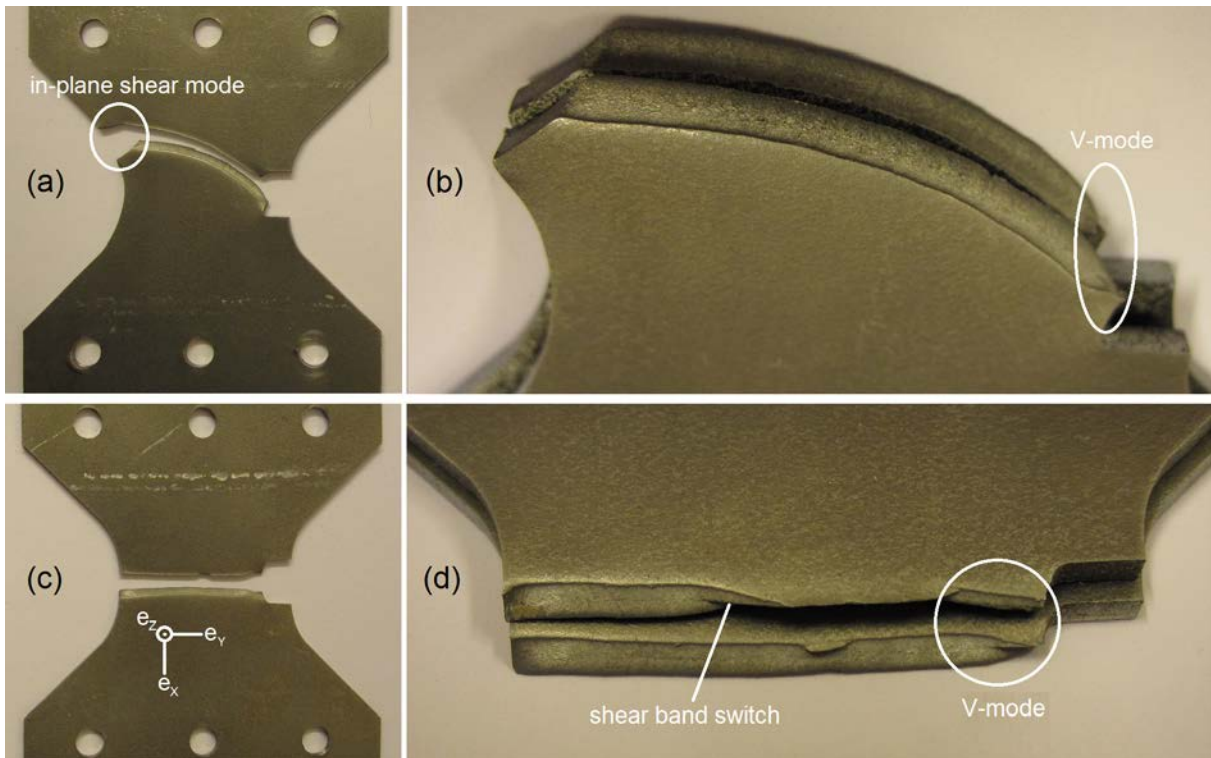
Pictures (a) and (b) display fracture of the Arcan-45 tests. Fracture started in a V-mode and then propagated in a slant fracture mode before the crack got arrested and finally ended in a flat shear mode. Pictures (c) and (d) display fracture of the Arcan-90 tests, where fracture initiated in a V-mode and continued in a slant fracture mode to global failure.
